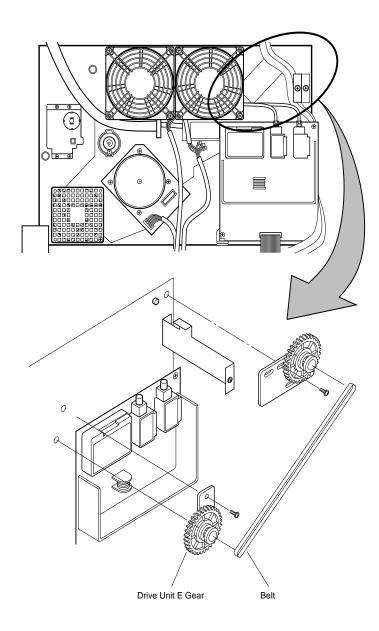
Drive Unit E Gear and Bracket Assembly
